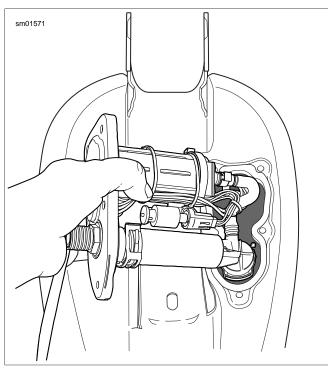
Removing/Installing Fuel Pump Module: All Models
